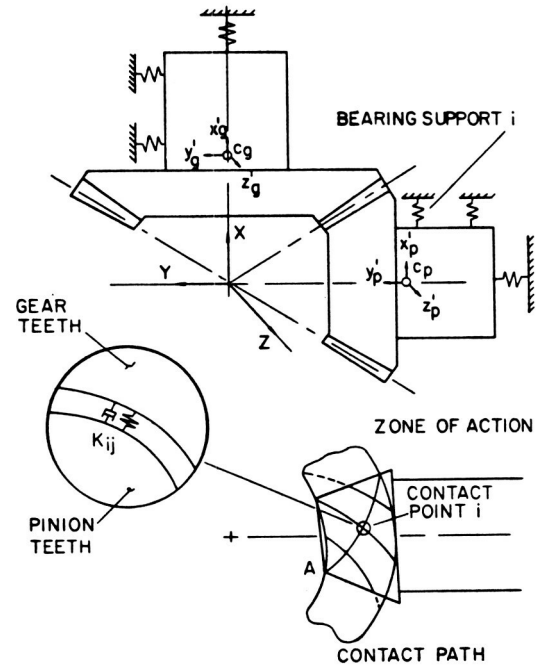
Geometry and mathematical model of spiral-bevel gears.
